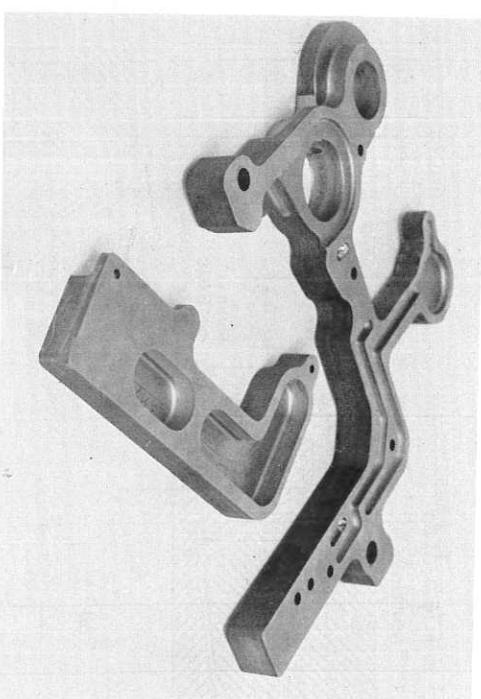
In order to fully utilize a 10,000-A machine both these components, the larger measuring 10 in. across, were machined simultaneously in 20 min by a single ECM generating tool. (Courtesy of the General Electric Company.)
